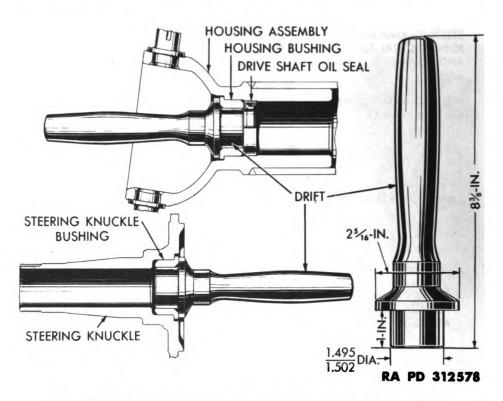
Installation of Oil Seal and Bushing with Drift 41-D-1535-25
